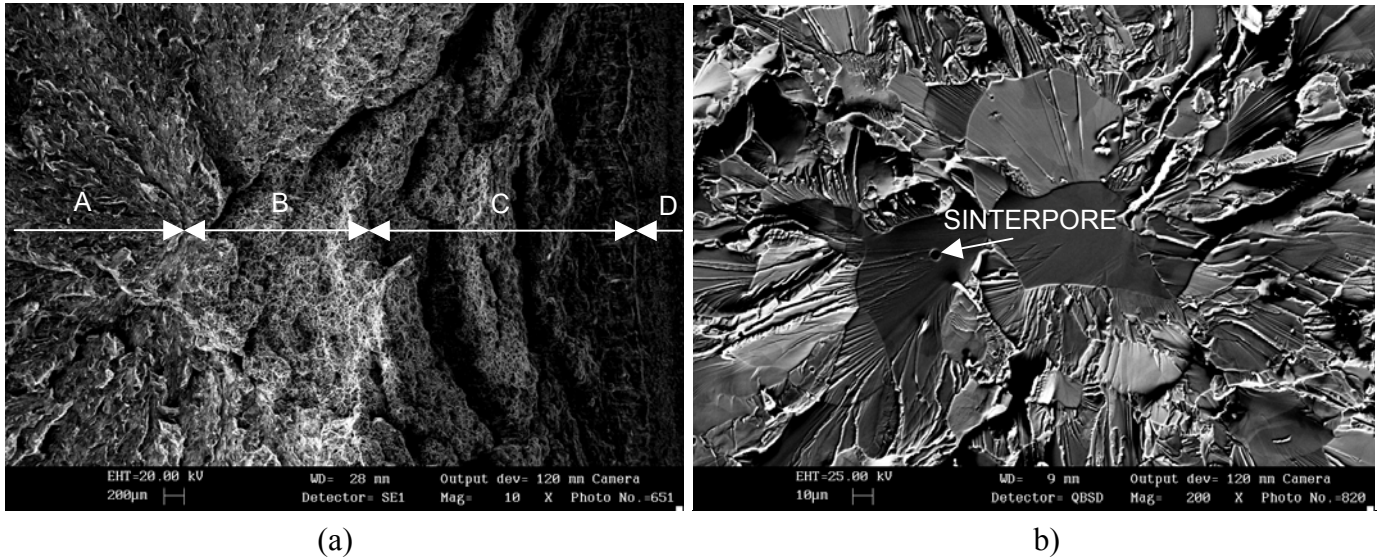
Fracture surfaces of (a) a J-integral sample tested at 485°C (A...final cleavage fracture, B...stable ductile crack growth, C...blunting zone, D...fatigue pre-crack) and (b) a bending sample tested at RT
